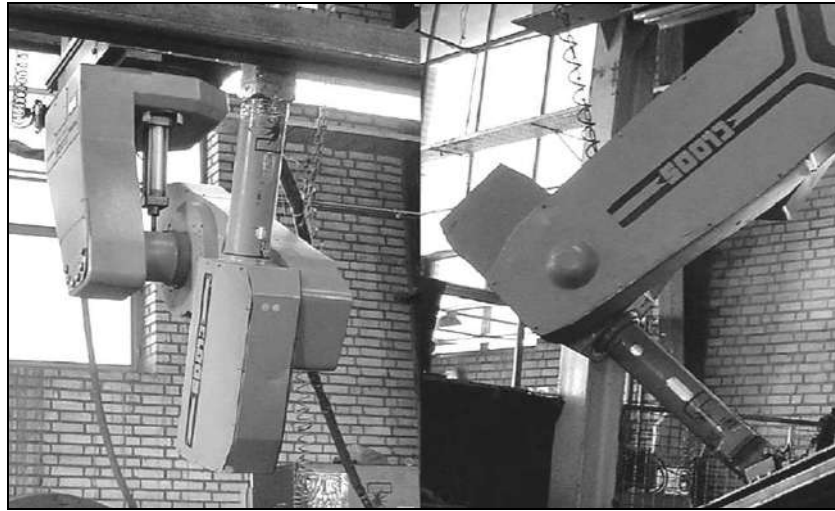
The welding robot and its apparatus used in this study.
